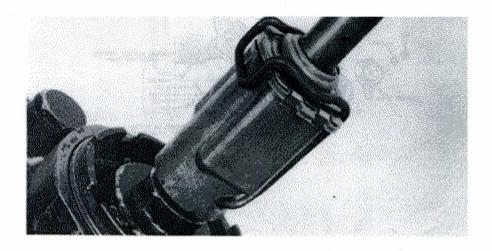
STEERING COUPLING CLAMP IN POSITION
